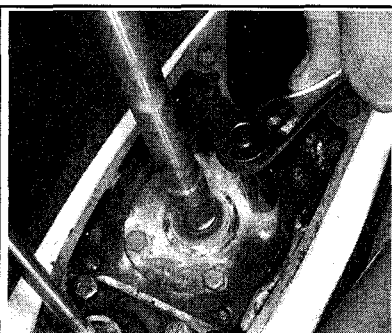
Remove the 4 bolts from the driveshaft bearing housing.
